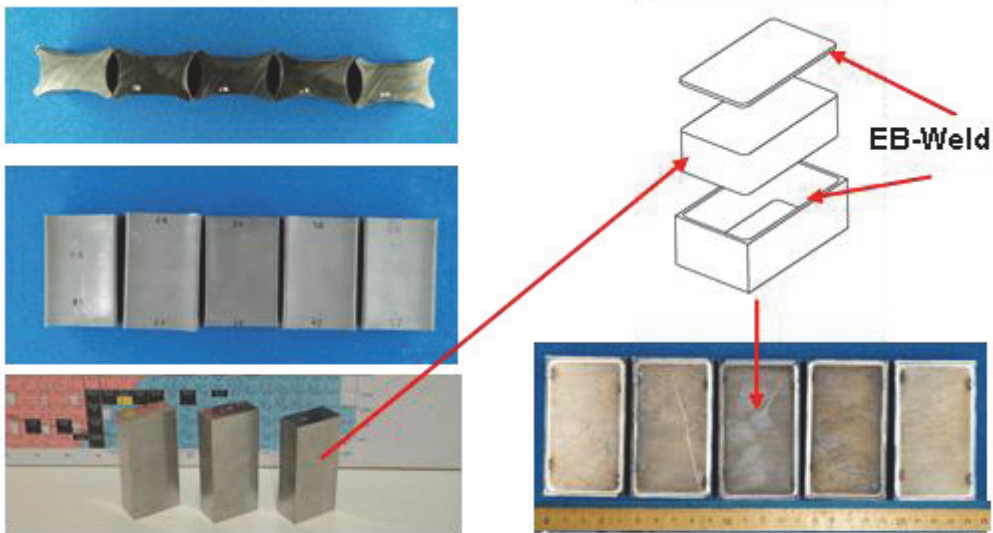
1 kg pieces after HIP, machining, boxing in a "sardine can" like canister, degassing and EB-welding of the lid.
